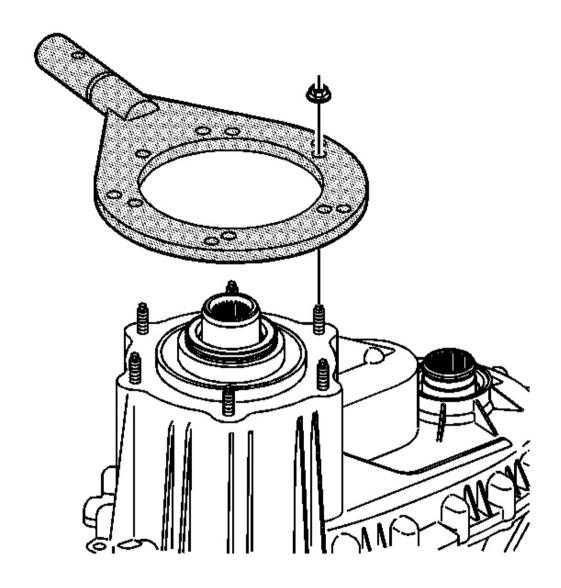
Mounting Transfer Case To J 45759 Courtesy of GENERAL MOTORS CORP.
